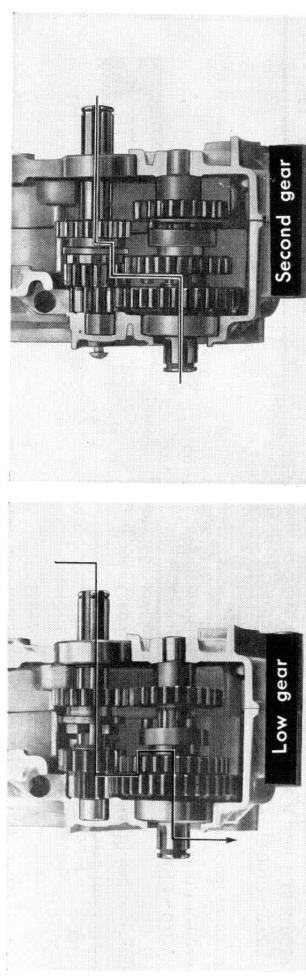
Gearing arrangement for C50, C50M, C65, C65M
